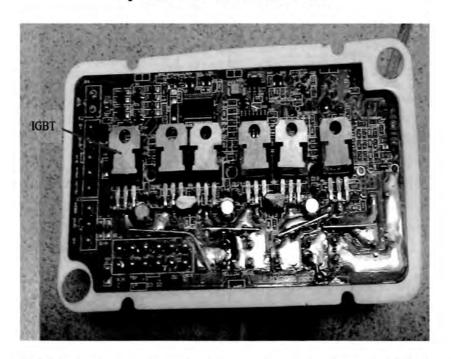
Motor controller with IGBT, capacity upto 5kW, type BAC-0282 48V/30A manufactured by magic motor.
